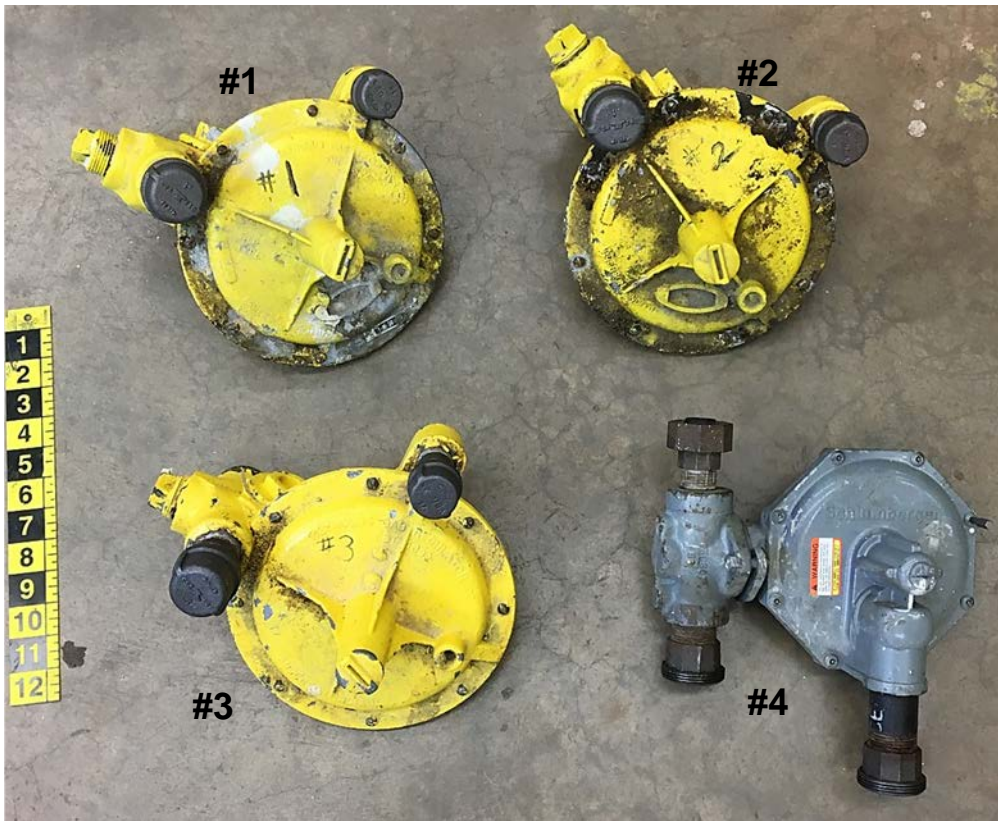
As-received exemplar gas regulator assemblies #1 through #4.
